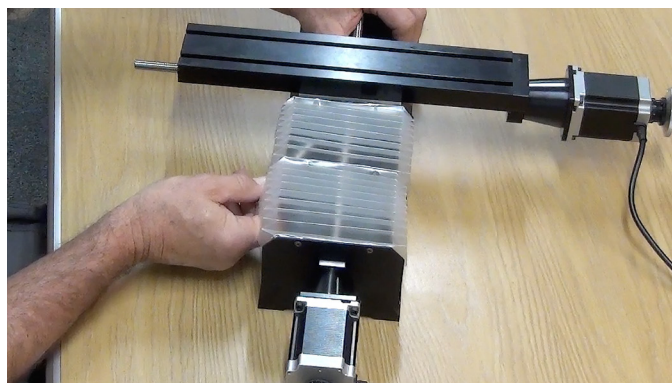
Use the Y-axis handwheel to move the saddle toward the stepper motor.
